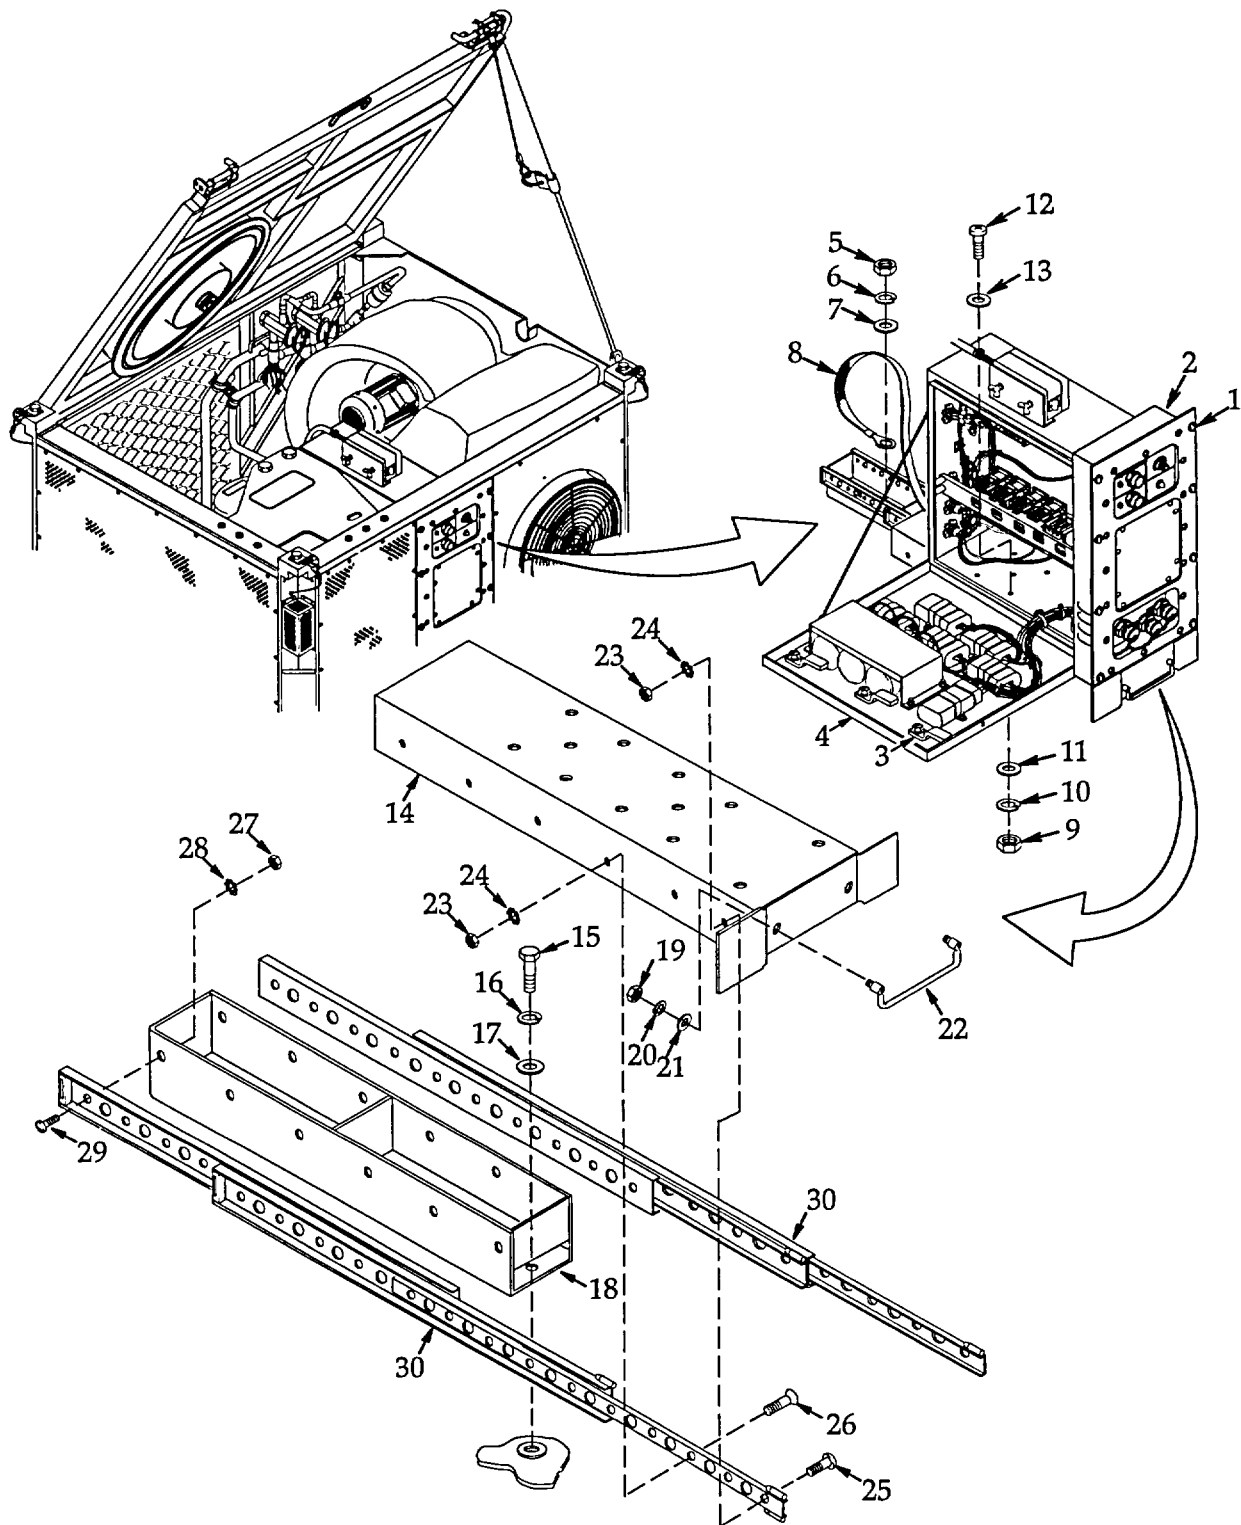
Electrical Assembly Mounting Bracket and Slide.
